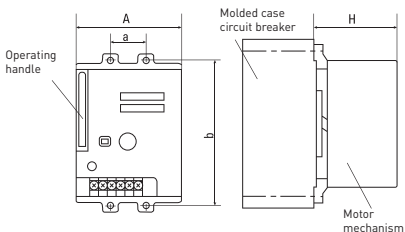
Overall dimensions of motor mechanism VA-99M 400, 630, 800
